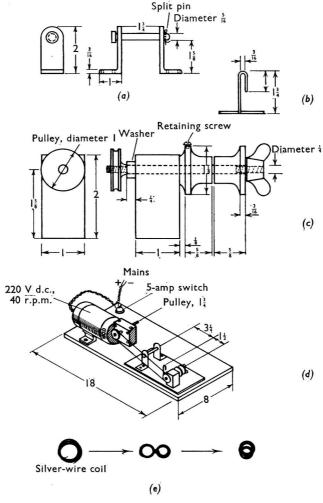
(a) Spindle; (b) guide pin; (c) split bobbin; (d) complete apparatus; (e) method of forming plug. (All dimensions are in inches)
